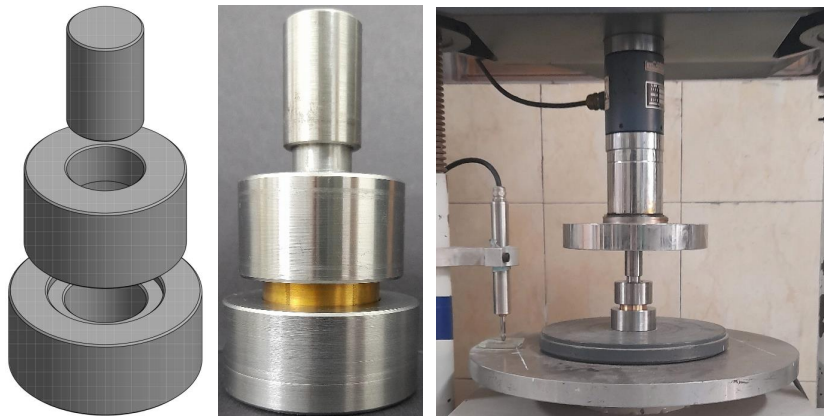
3D model and the actual mounting example of fixtures used in extraction test
